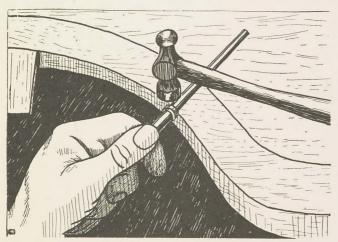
Setting a ring true on a triblet, which is held across the edge of a jeweller's bench.
